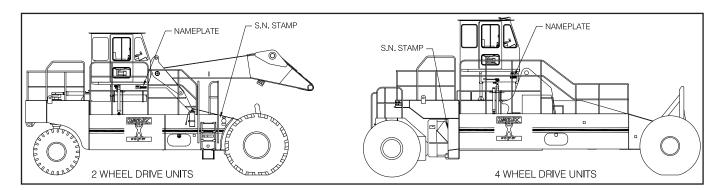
Machine Identification (Carriage Assembly Shown Removed for Clarity)
